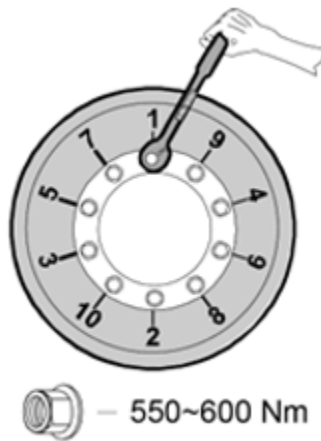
Hub mounting torque range and bolt tightening pattern
